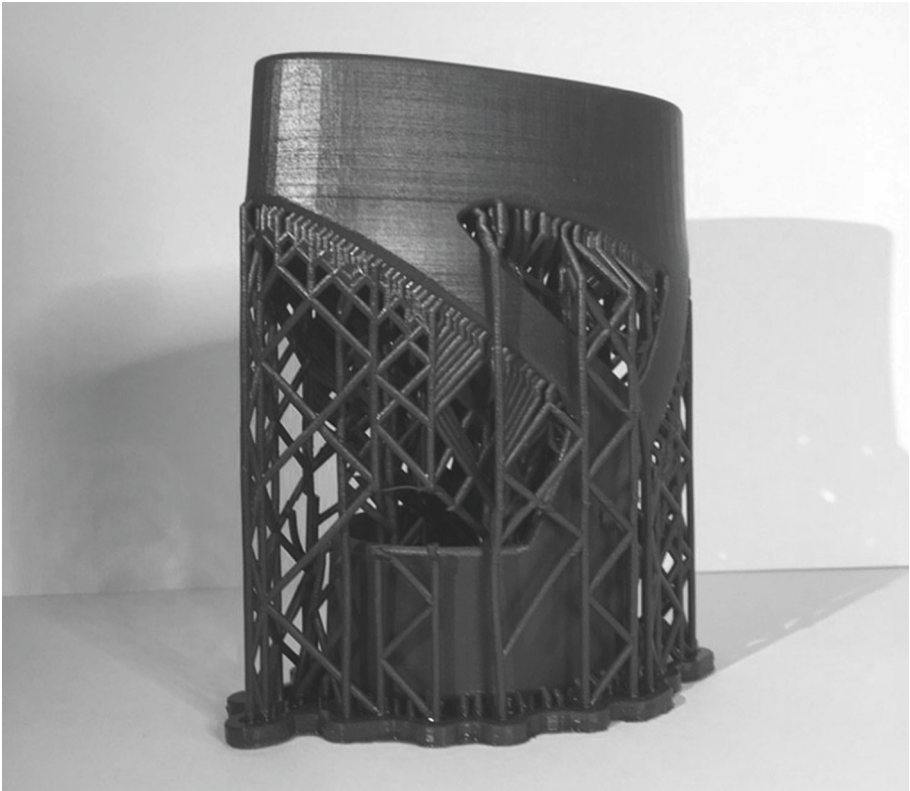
Prototype of the device made by 3D printing. The prototype, in black resin, was created using the Formlabs SLA Form2 printer, chosen for its high definition and the type of materials that can be used.
